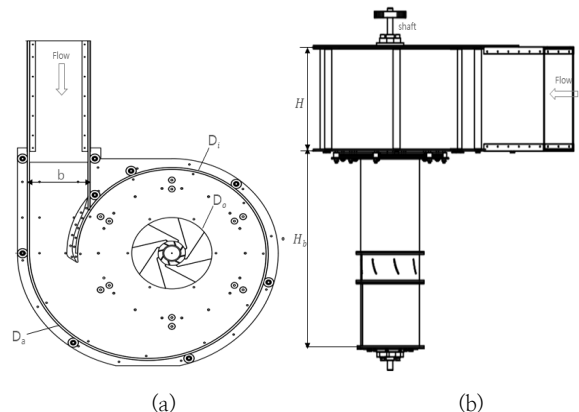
Schematic of (a) top view and (b) sectional view of vortex turbine.
